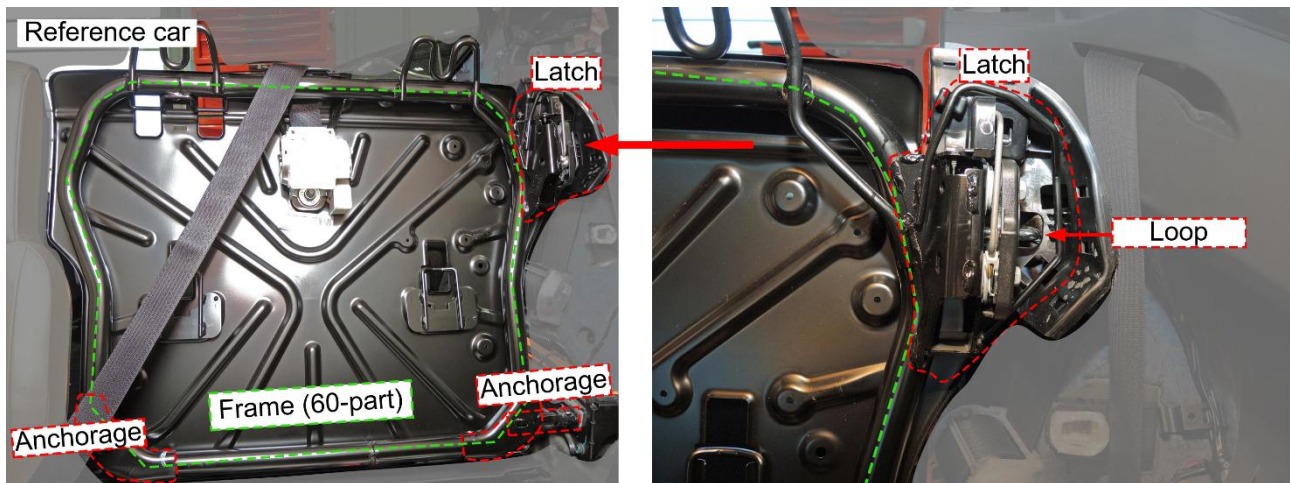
Front of rear seat-back 60-part with frame, anchors and lock welded to the outside of the frame. Photo: NSIA
